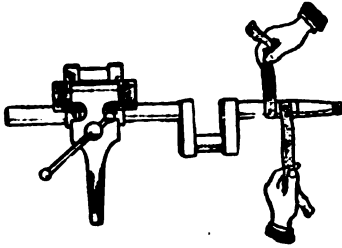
Cleaning up roughened surfaces of crank shaft with very fine emery cloth.
